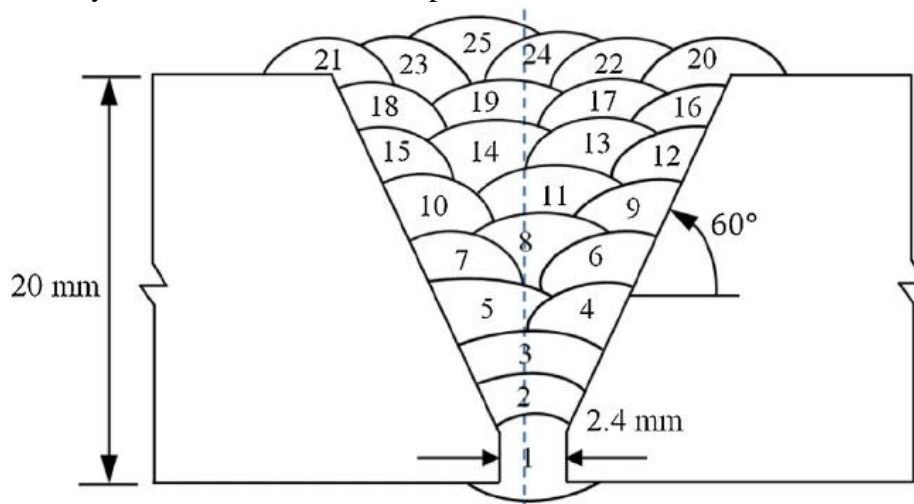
Welding sequence in bevel weld [24]
